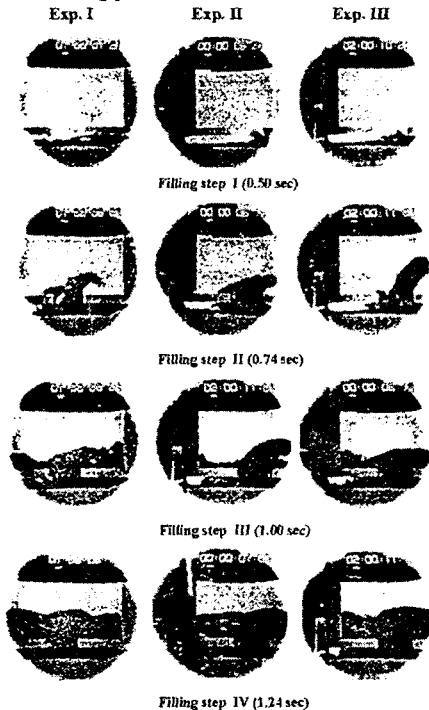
Frames from x-ray video showing the filling of the runner and mold cavity<sup>(11)</sup>
